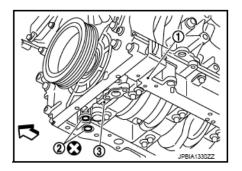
Identifying O-Rings Of Lower Cylinder Block And Oil Pump Courtesy of NISSAN MOTOR CO., U.S.A.
